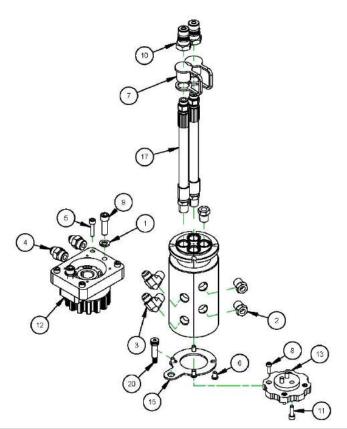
PNEUMATIC DRIVE ASSEMBLY (P/N 59632)
